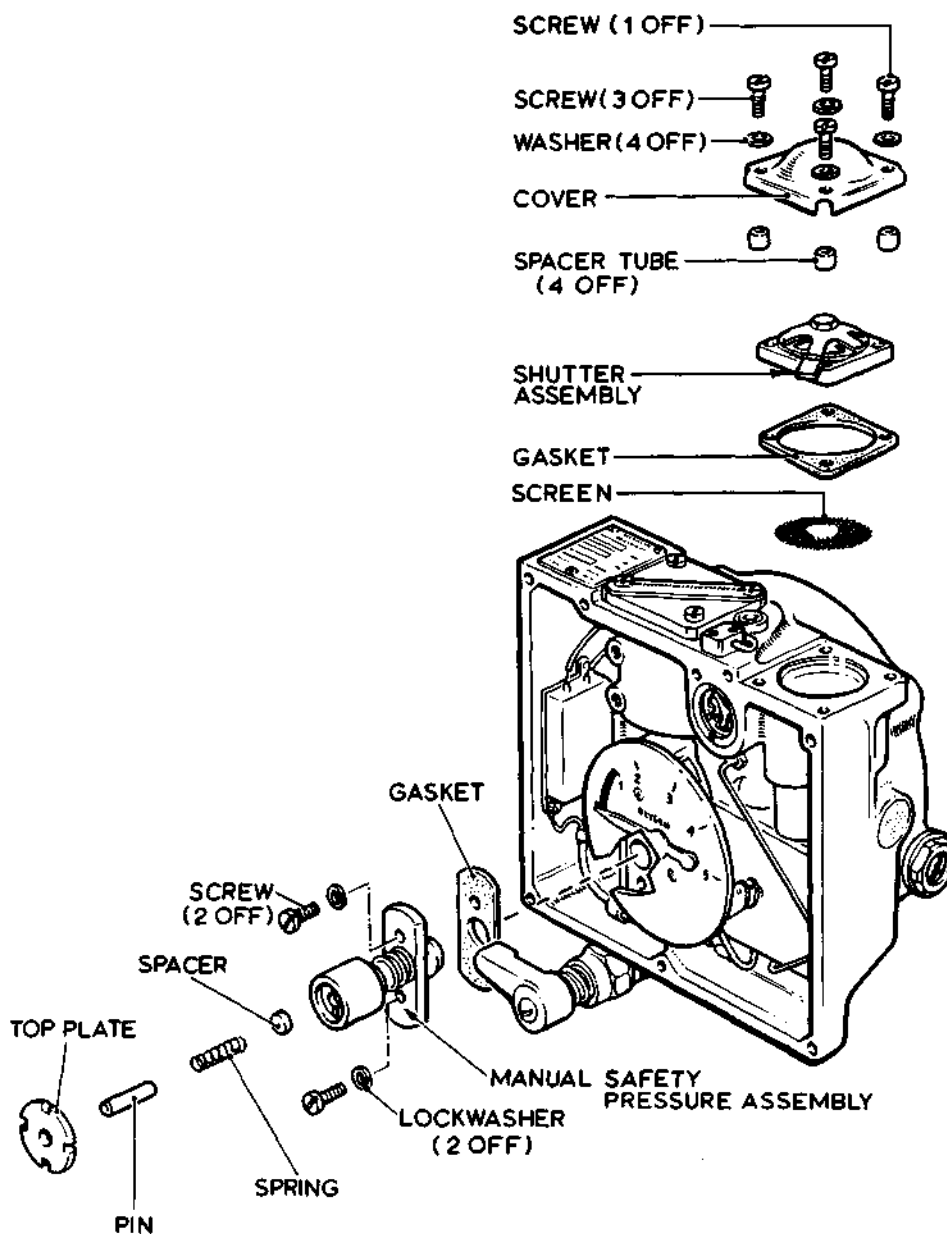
Safety pressure assembly and air inlet shutter assembly removed
